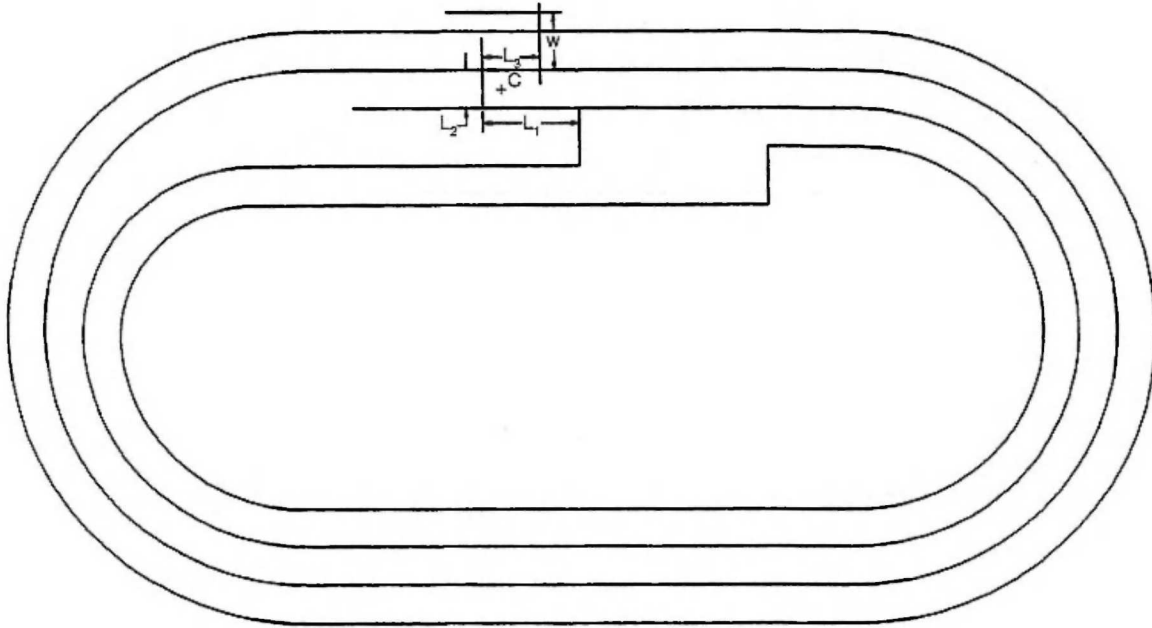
Construction lines for drawing the switchback (Step 2).
